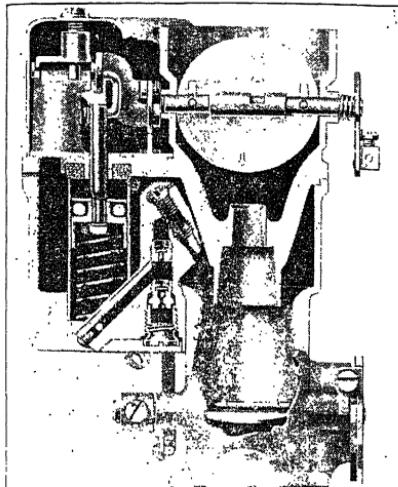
Carburetor Choke Valve and Accelerating Pump
